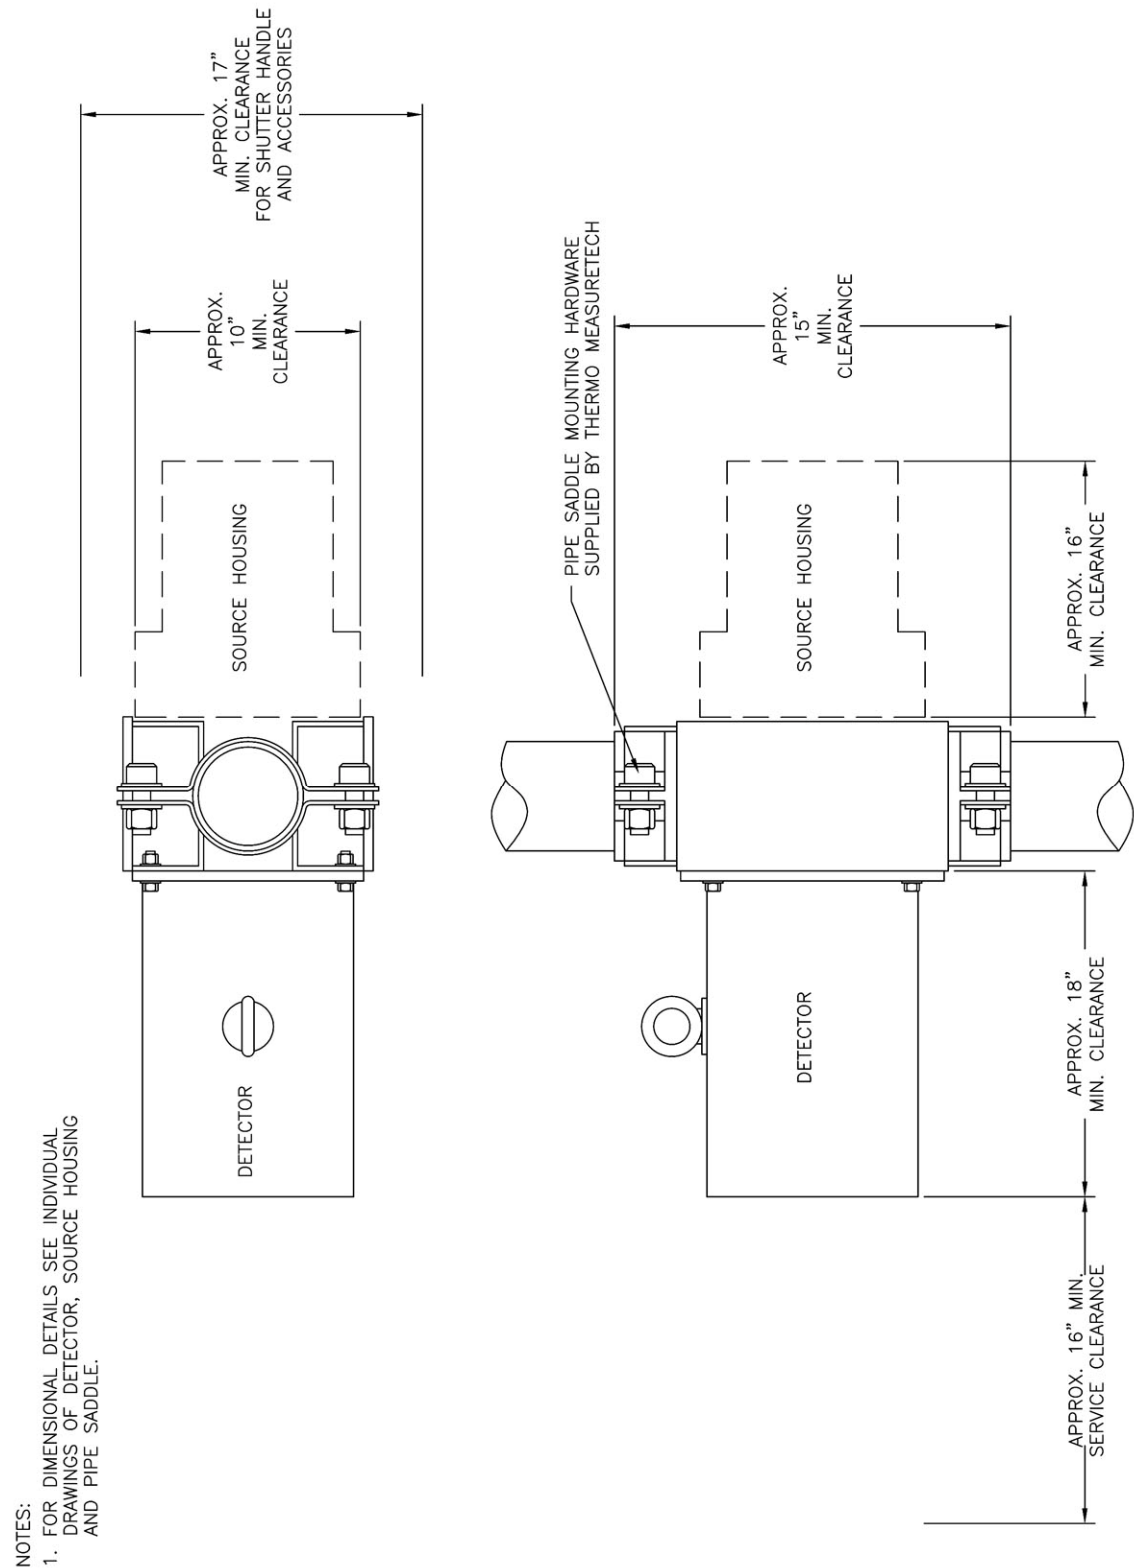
85726N: Installation drawing, gauge head, pipe saddle mount (sheet 1 of 1)
